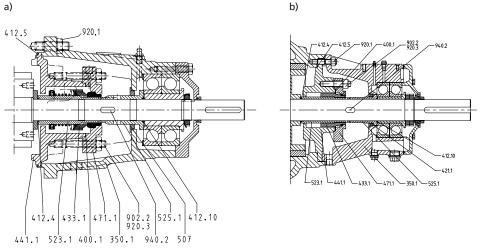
Removing the mechanical seal: a) sizes 32-200 and b) size 250
